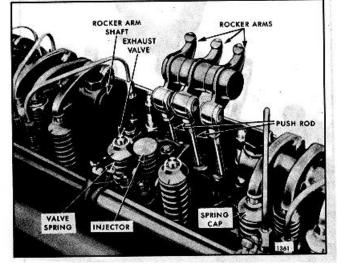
Valve and Injector Operating Mechanism (Two-Valve Head)
